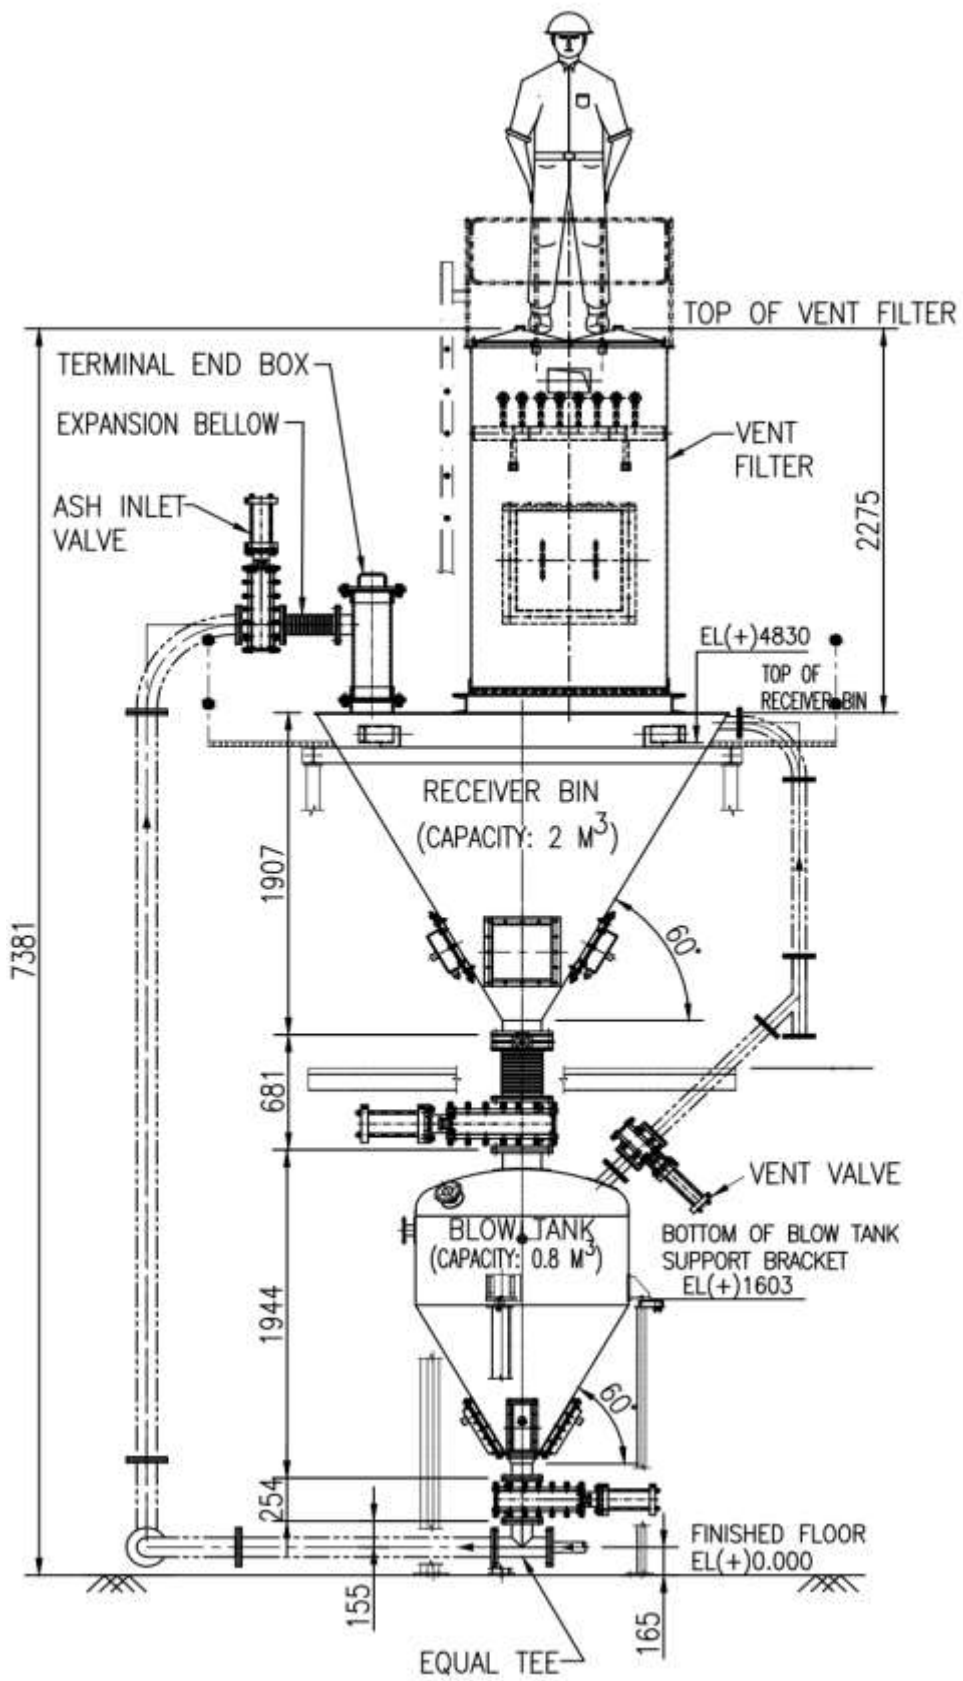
Stacked-up system assembly of the positive pressure pneumatic conveying test rig
